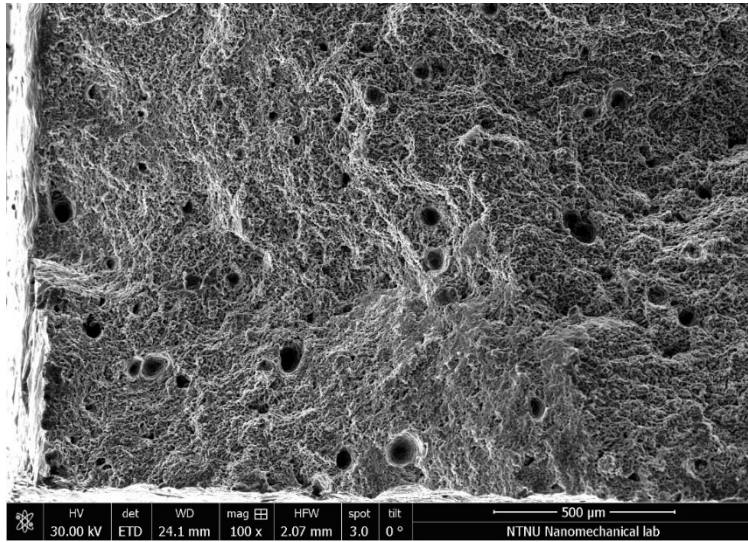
Additional SEM image of the fracture surfaces at low magnification for a selected tensile test specimen. Specimen code: FZL9. Magnification 100x.
